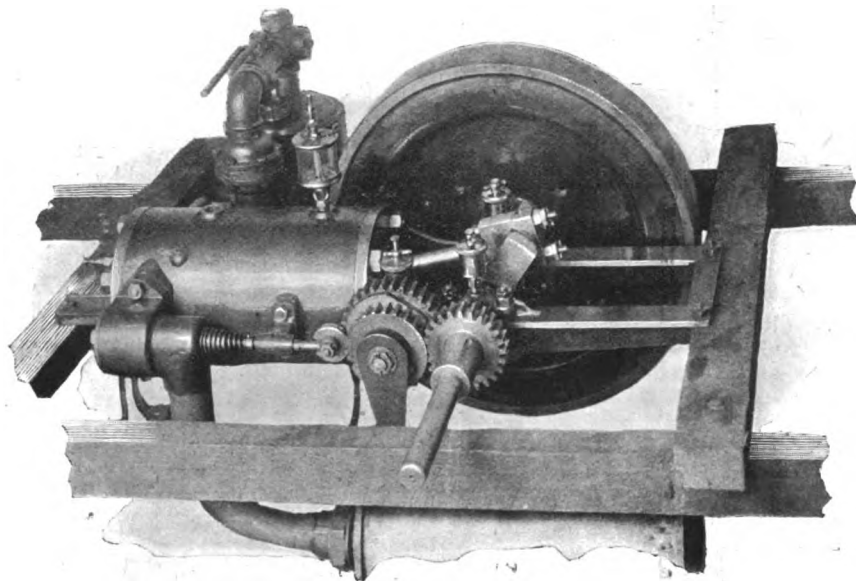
THE CRAMPIN-SCOTT MOTOR.
